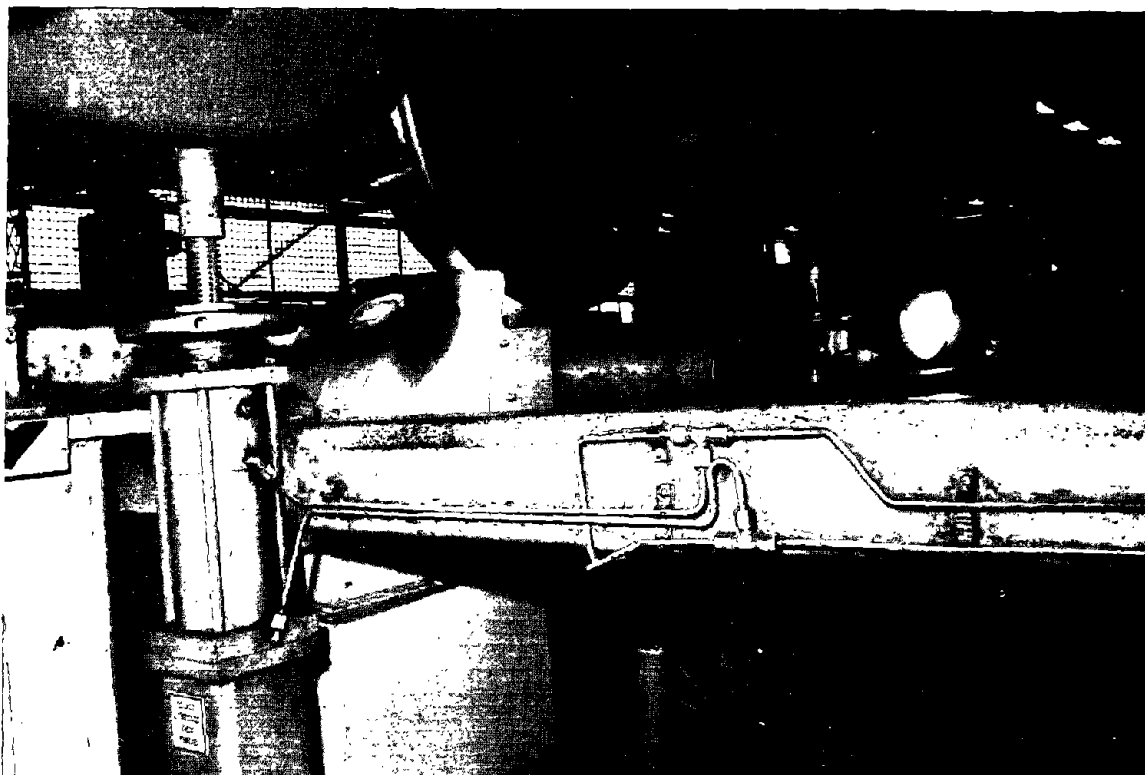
THE HYDRAULIC JACKS USED TO SUPPORT THE TRANSIT CAR ON THE BELT GRINDER.
